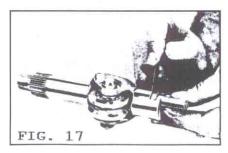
Checking Sector Shaft Lash Adjuster End Clearance
